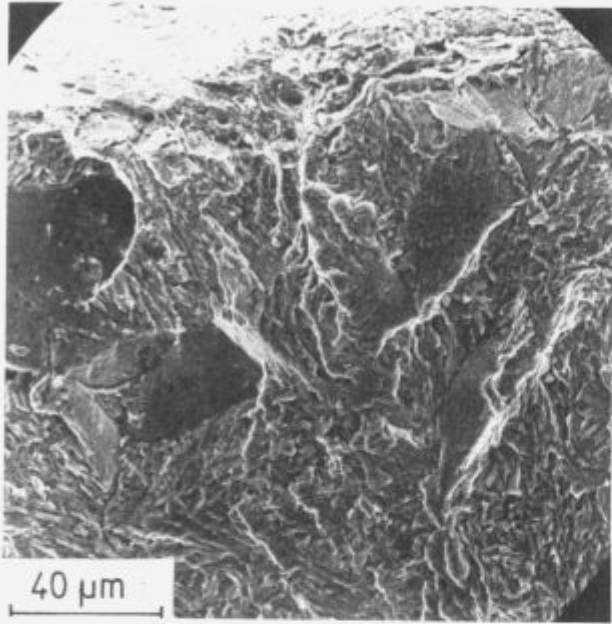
Surface of one of the cracks in fig. 13 near the bottom of the pitting.
